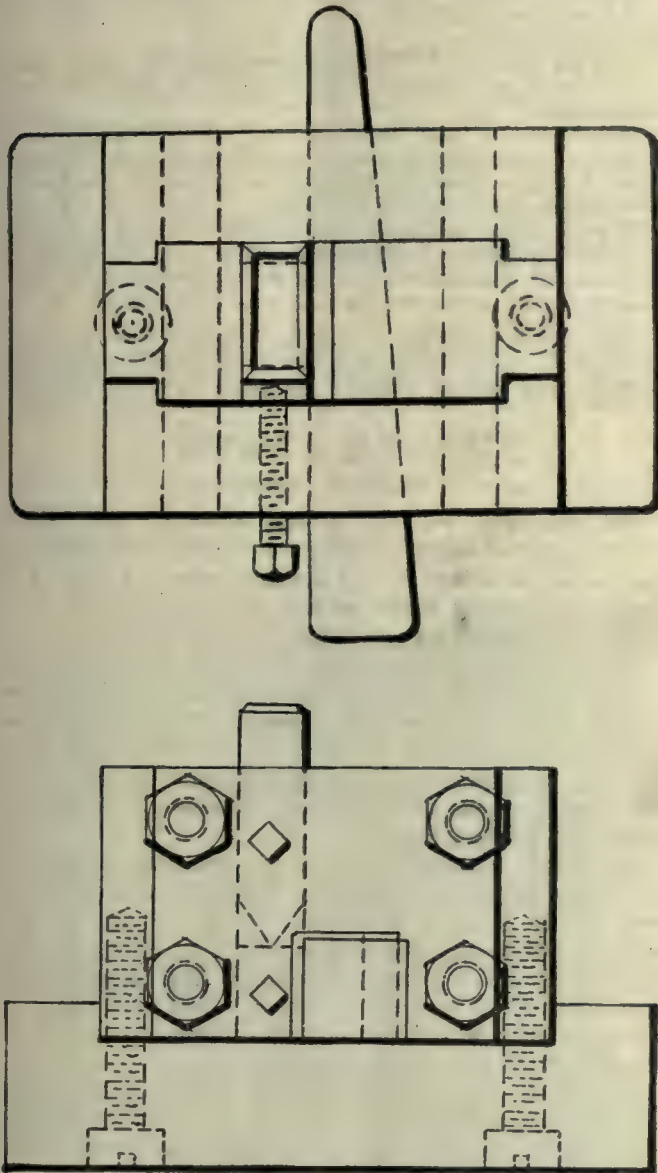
FIXTURE TO HOLD DIES FOR HUBBING
